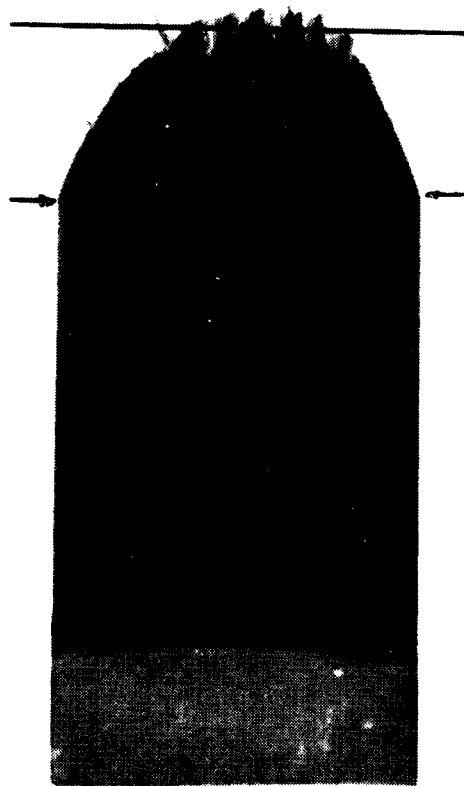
Fracture Surface - CT Specimen 15-6
